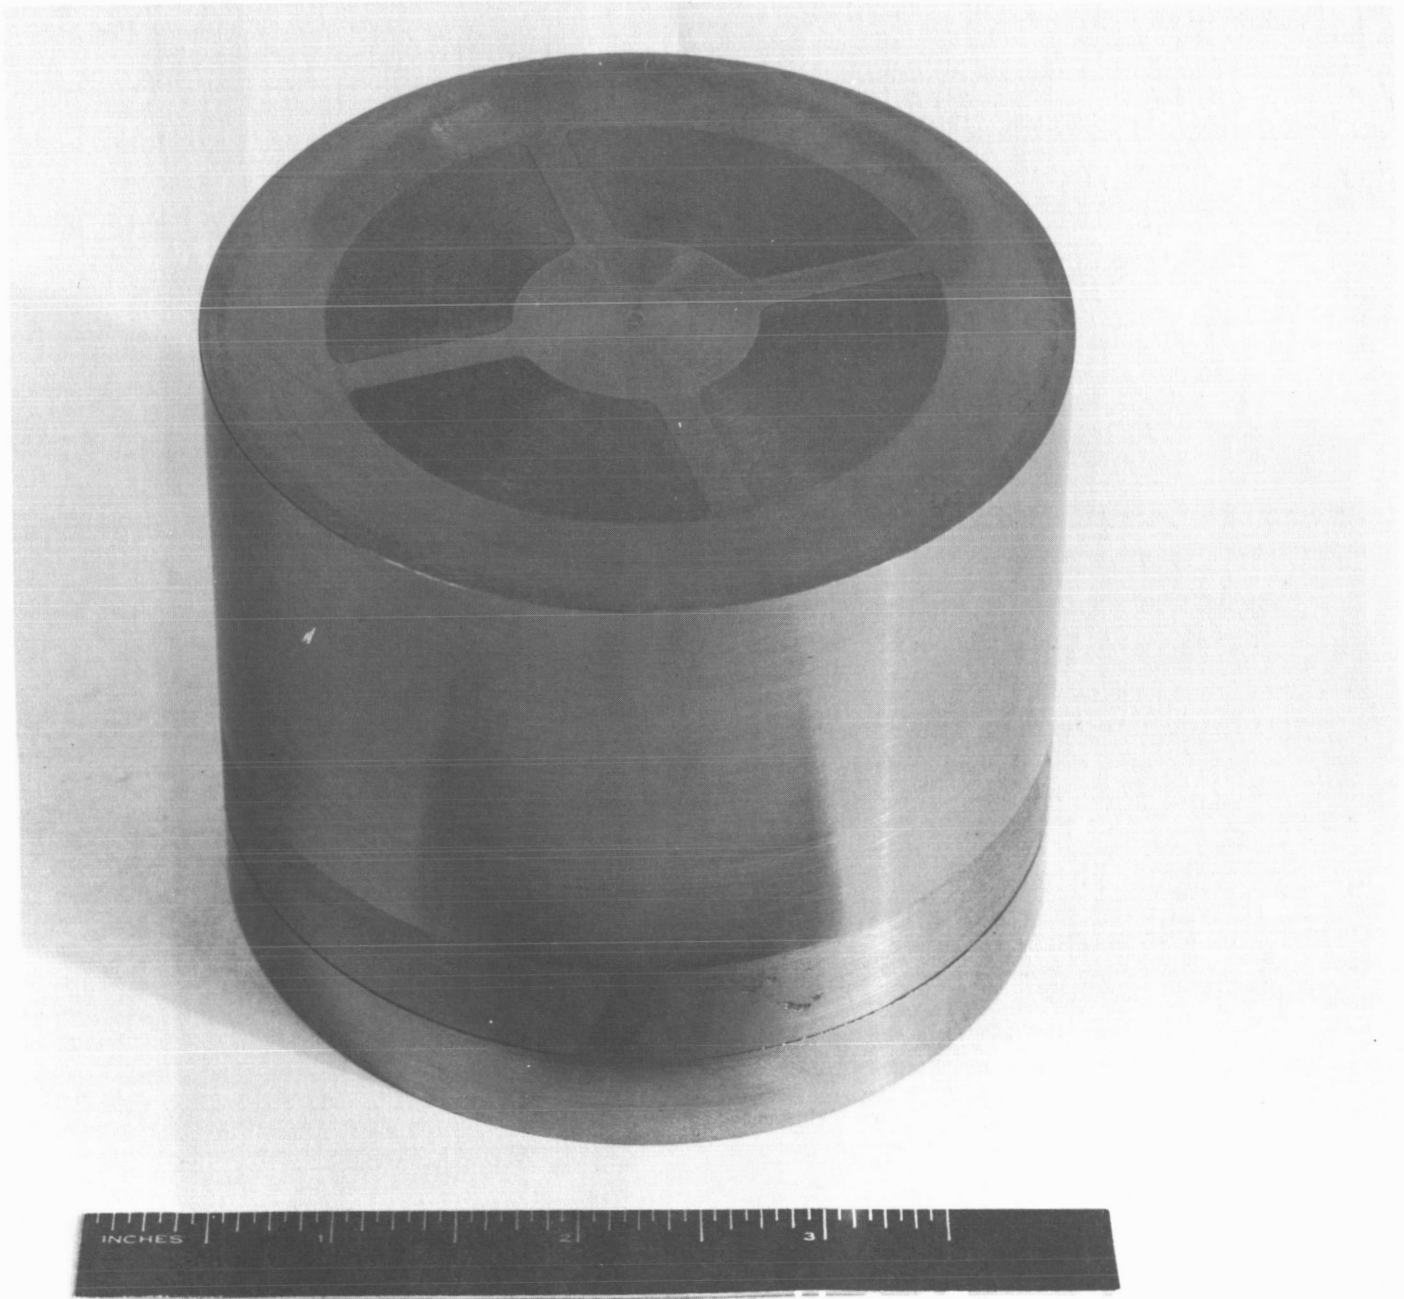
Test Sample After Clean Up Machining - Eye and Discharge View
